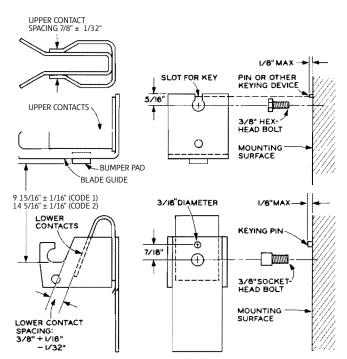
Dimensions and tolerances for mounting hinge-type NX fuse contact assemblies.
